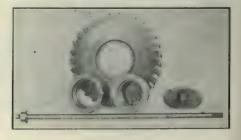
B. & S. Inserted Tooth Milling Cutter.
